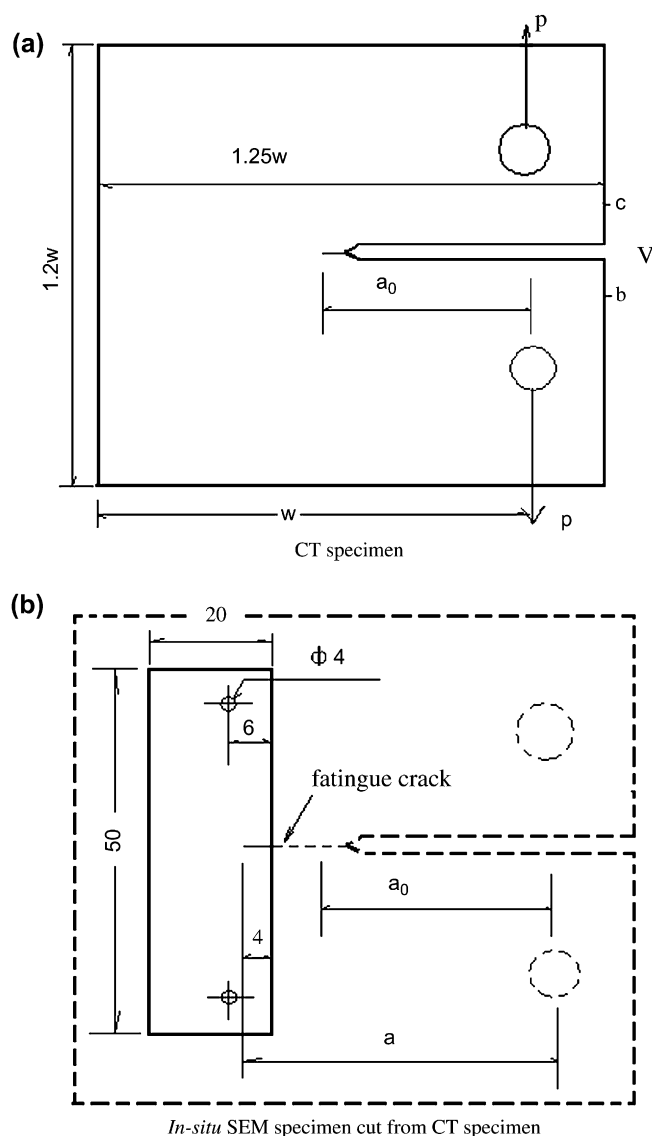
Geometry and dimensions of the specimens with  $W$  being the width of the specimen,  $V$  the displacement measured by the displacement gage mounted on the specimen between  $b$  and  $c$ ,  $P$  the fatigue load.
